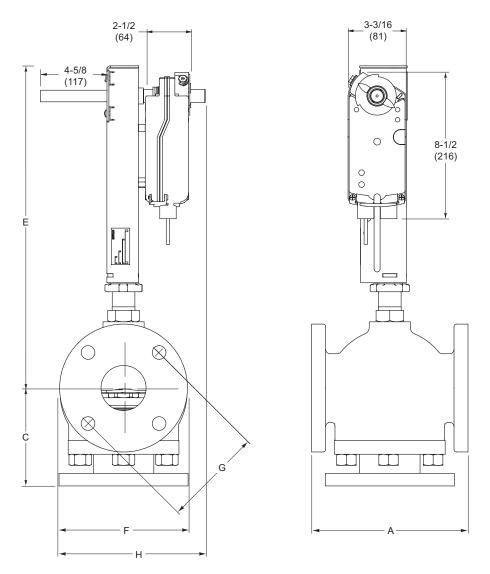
Mx41-6153 with 21/2" to 4" VB-9313 Flanged 3-Way Globe Valve With AV-607-1 Linkage.
